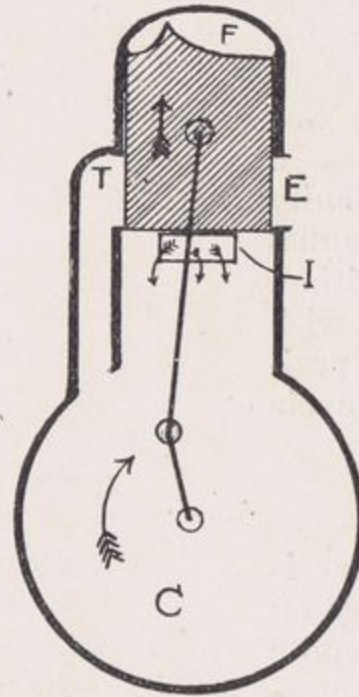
Showing the Piston on the top of the stroke with the gas mixture compressed in the top of the cylinder F. The transfer and exhaust ports are closed and the inlet port I. is open to allow a fresh charge of mixture to enter crank chamber.
